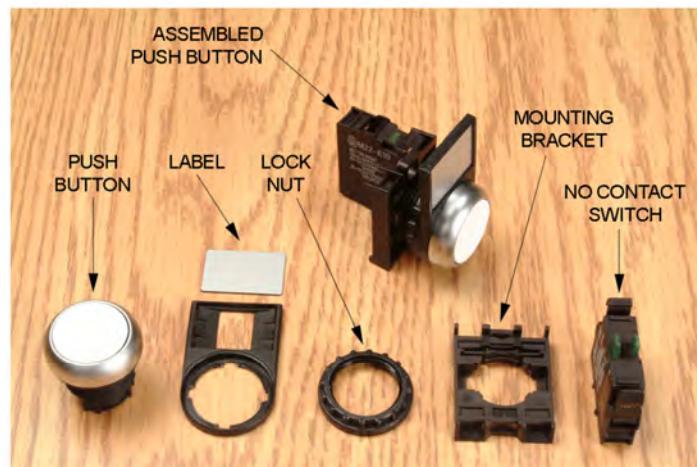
Components required to assemble a typical push button, and an assembled push button.
